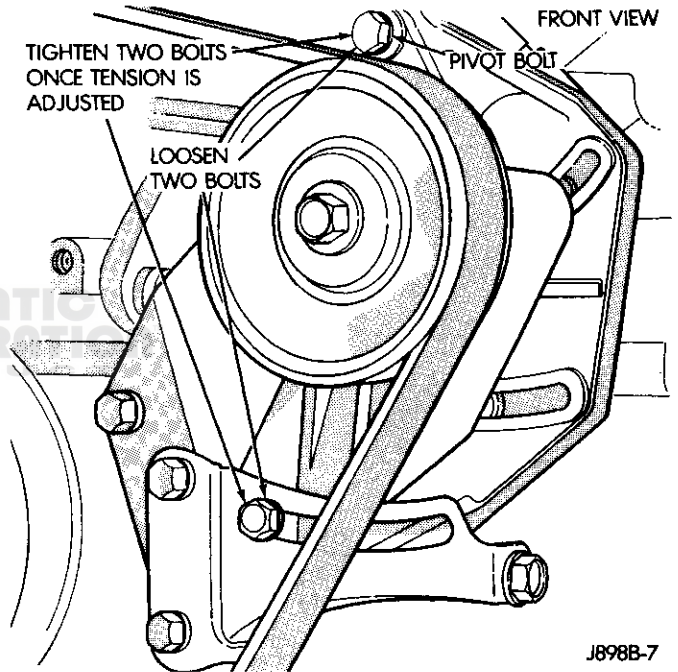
Serpentine Drive Belt Adjustment 2.5L without P.S. — Front View
